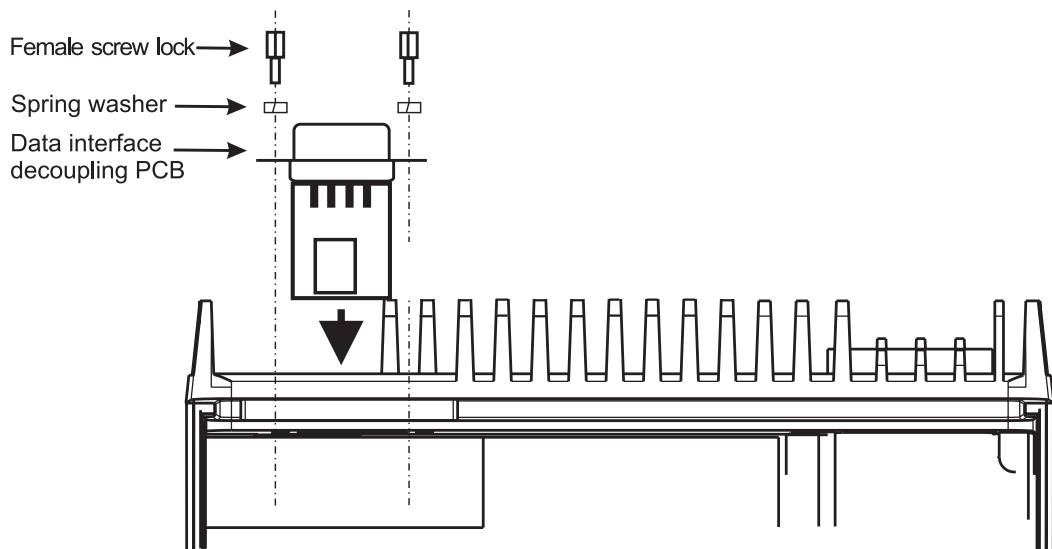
Data Interface Decoupling PCB Mounting: Series I Chassis
